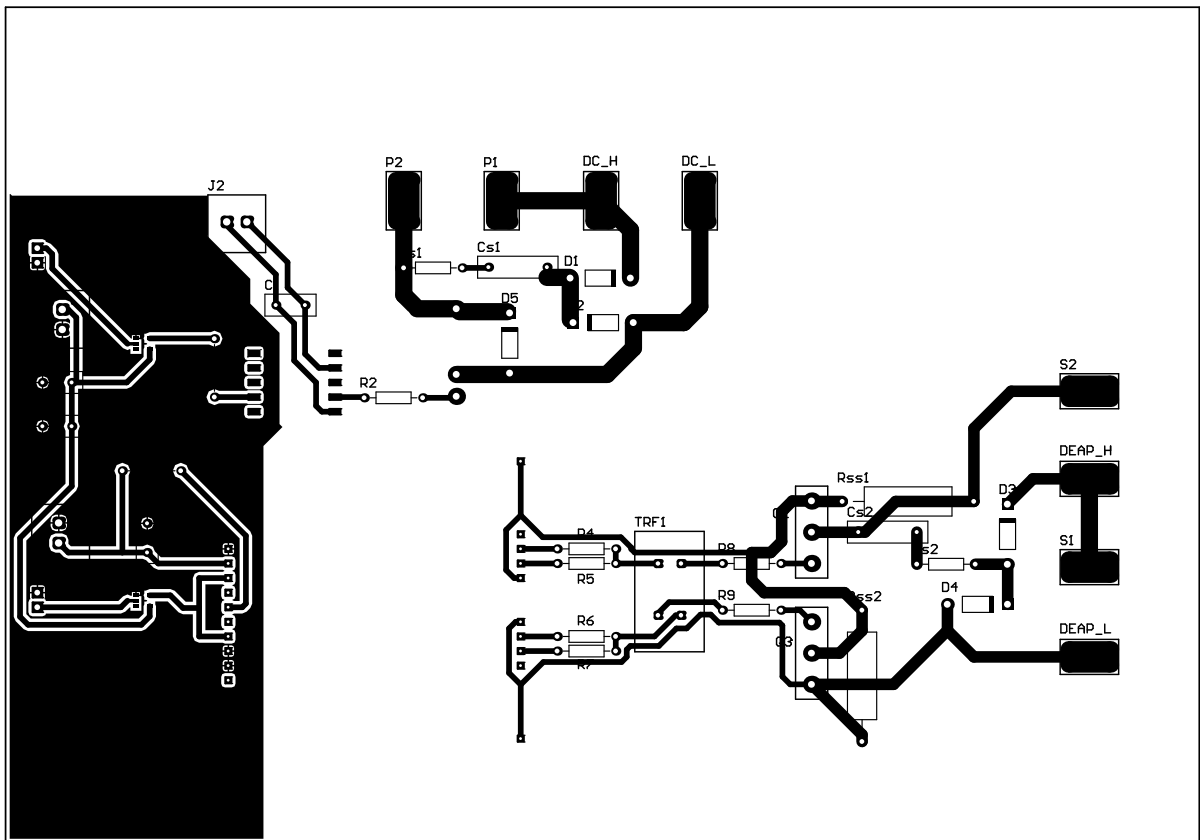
Bidirectional flyback converter with GBC PCB layout.
